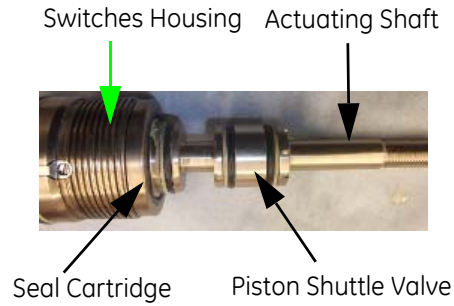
The Seal Cartridge & Piston Shuttle Valve
